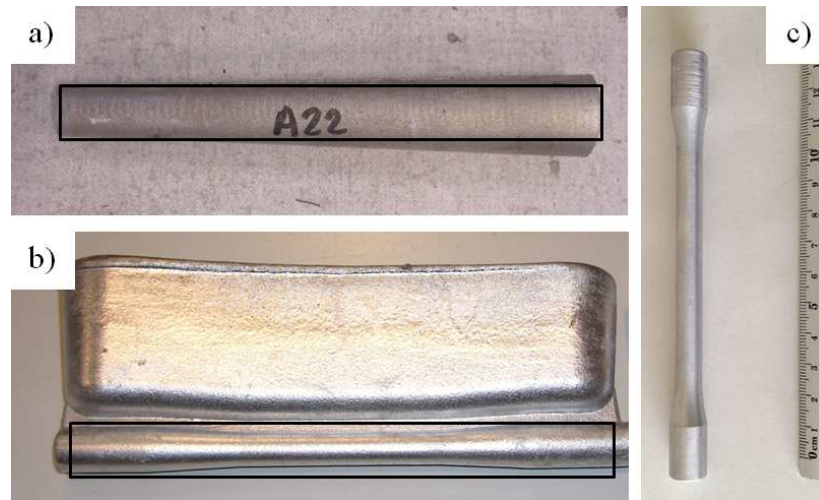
Castings obtained from: a) sand mould; b) permanent mould. The black rectangles mark the areas where the tensile specimens c) were machined.
